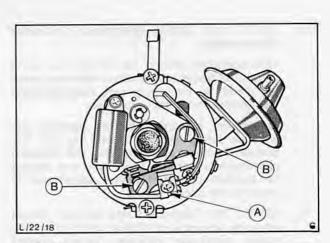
Contact breaker points removal (Motorcraft distributor)
